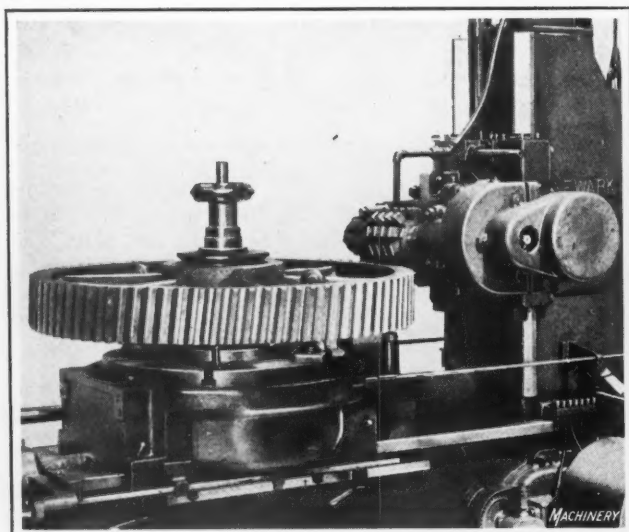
Cutting a Right-hand Gear with a Right-hand Hob—Number of Teeth 83, Angle 7 Degrees
